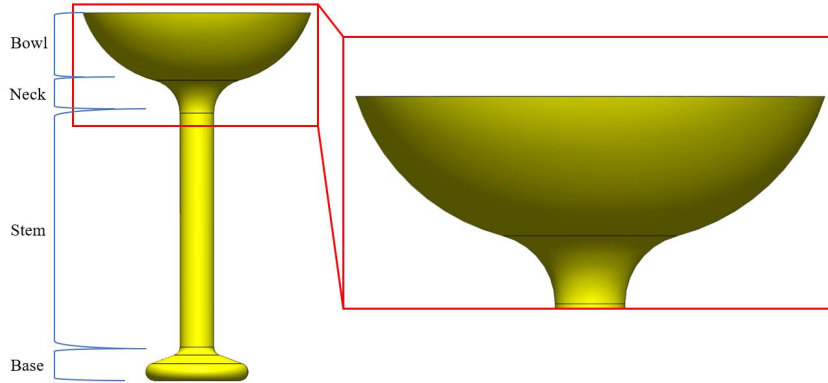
Side view of the goblet CAD drawing to be printed. Bowl rim diameter is $5369\mu m$, bowl radius of curvature is $2400\mu m$ and neck radius of curvature is $800\mu m$.
